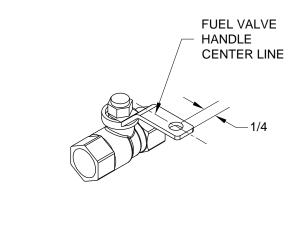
DRILLING THE FUEL VALVE 4161089 HANDLE
